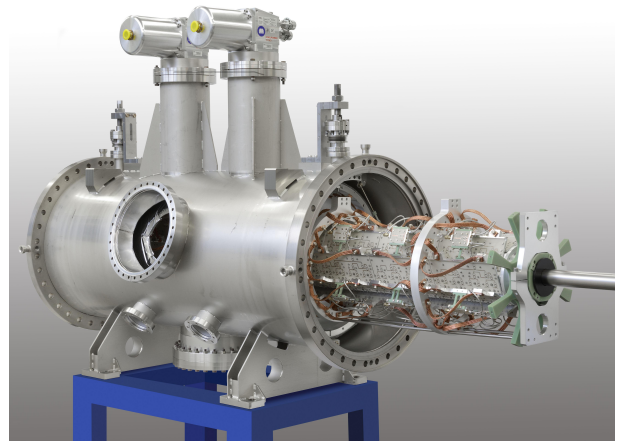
Assembly of pick-up tank. The full sub-assembly of the ring slot coupler structures for 2-4 GHz is only partially inserted. Cryogenic cooling heads are installed at the top. Assembly has been done under clean room conditions.
